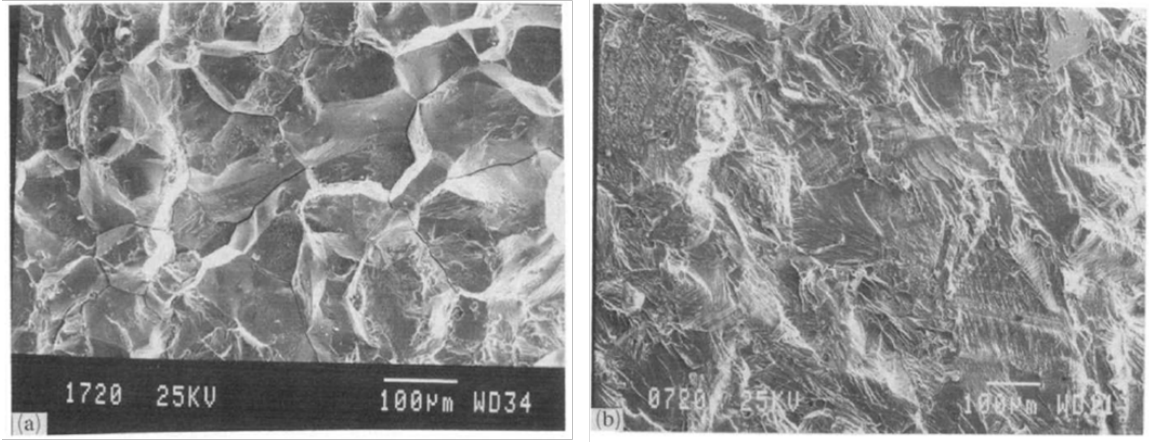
IN 718 fracture surface tested at 650°C at 0.05 Hz in (a) air and (b) vacuum [25].
